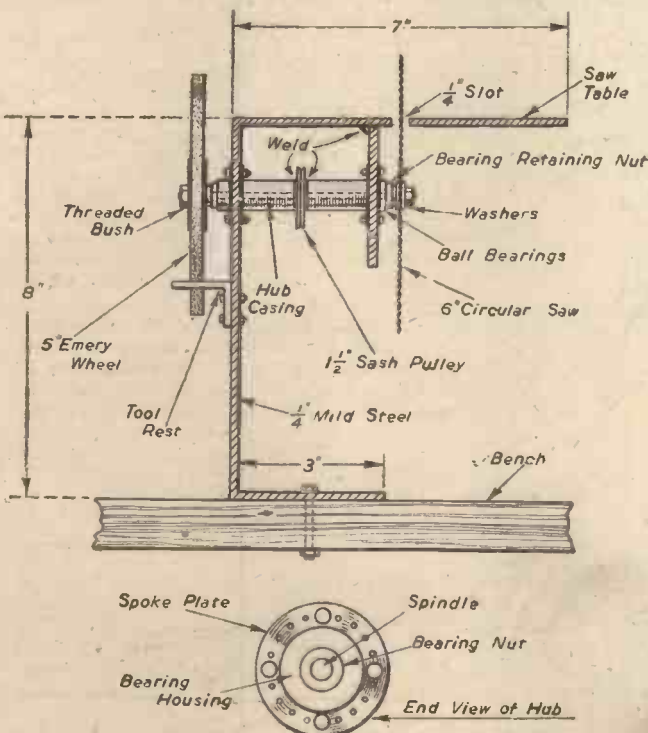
Sectional view of bench grinder and saw, and detail of hub.
